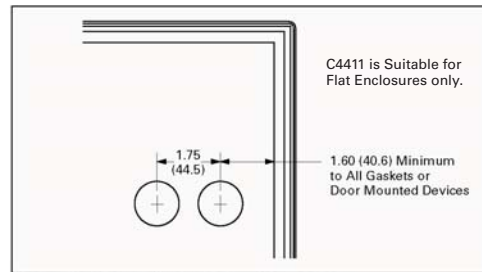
PILOT DEVICE HOLES — INCHES (MM)
